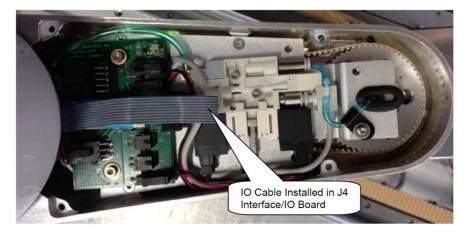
Vacuum Gripper Configuration with Vacuum Interface Board
